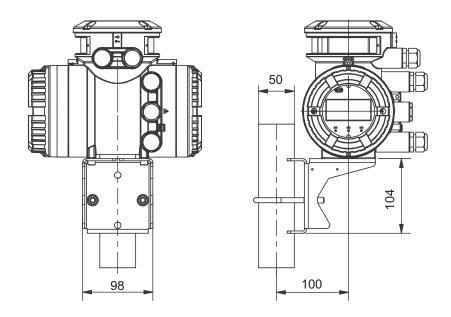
Dimensions of transmitter in mm, attached by sheet metal console (bracket)
